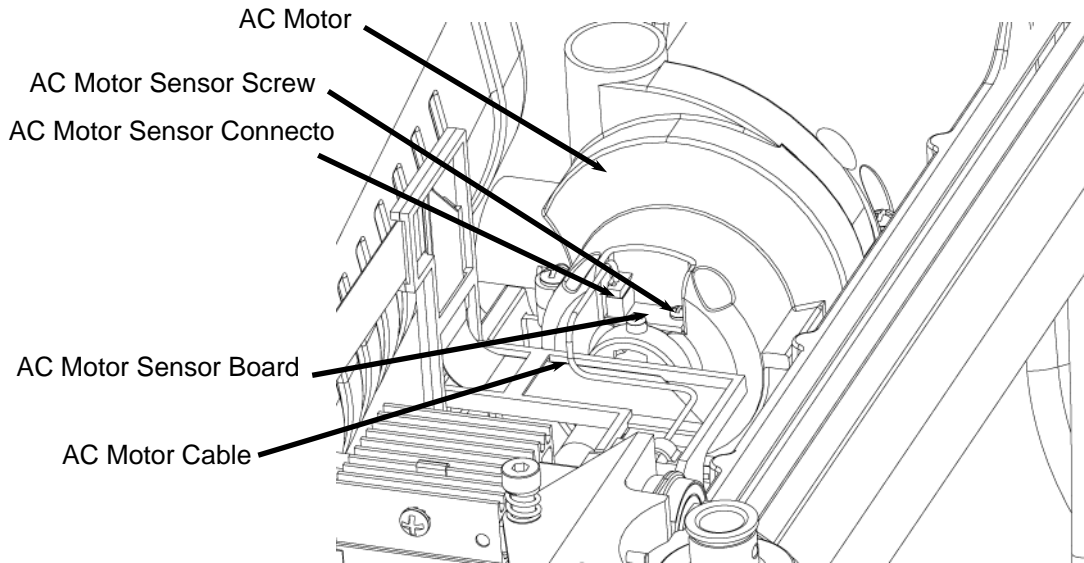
LOCATION OF AC MOTOR SENSOR
